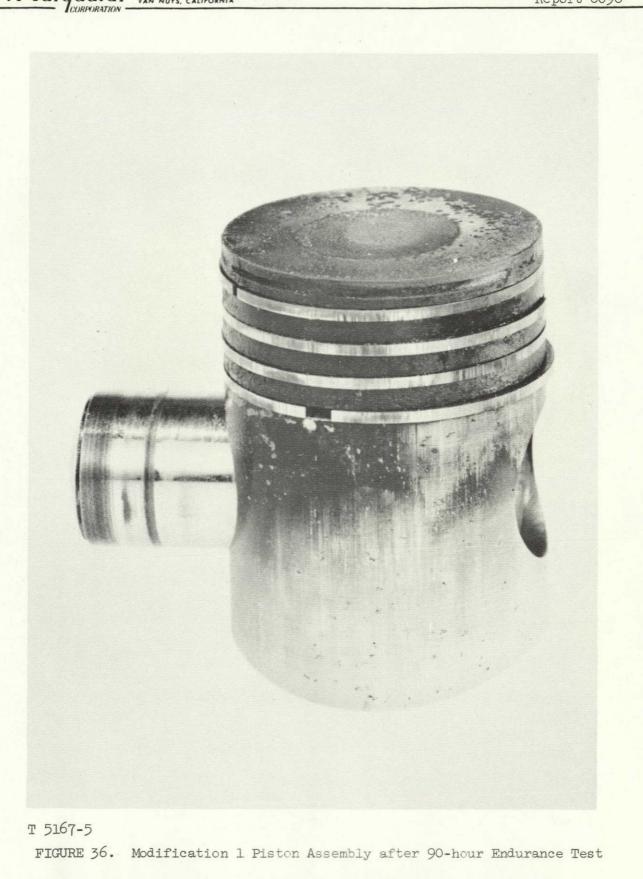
Modification 1 Piston Assembly after Test 5167/5
